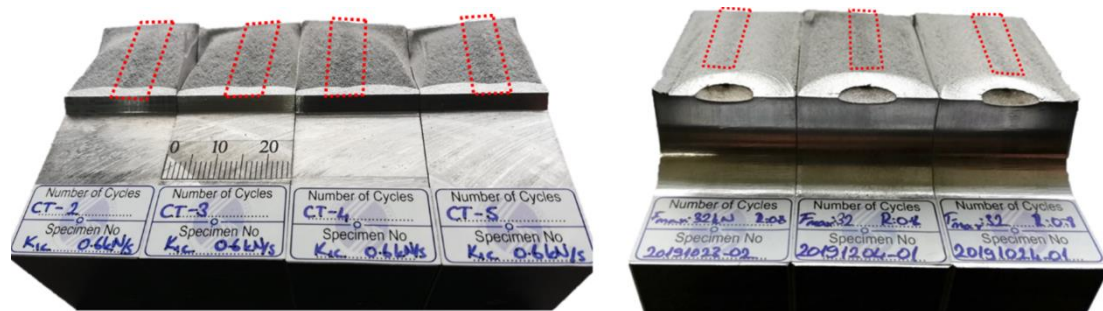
Fracture surfaces of CT and LJ specimens with FCG lagging
